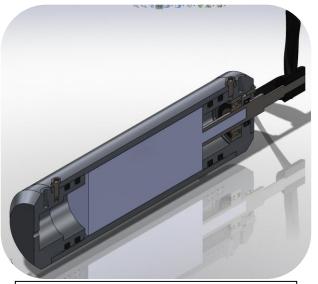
Custom thruster enclosure originally intended to be used for all thrusters, now being used for manipulator rotation whenever the ROV is surging, swaying, or yawing. The enclosures were waterproofed with duel o-ring seals between the aluminum tube and aluminum end caps. The front end cap contains a spring-reinforced PTFE shaft seal. Manufacturing proved to be more challenging than originally expected. Despite this, one prototype was completed, and due to its high power output has instead been chosen to power the rotation of the manipulator at reduced voltage.
